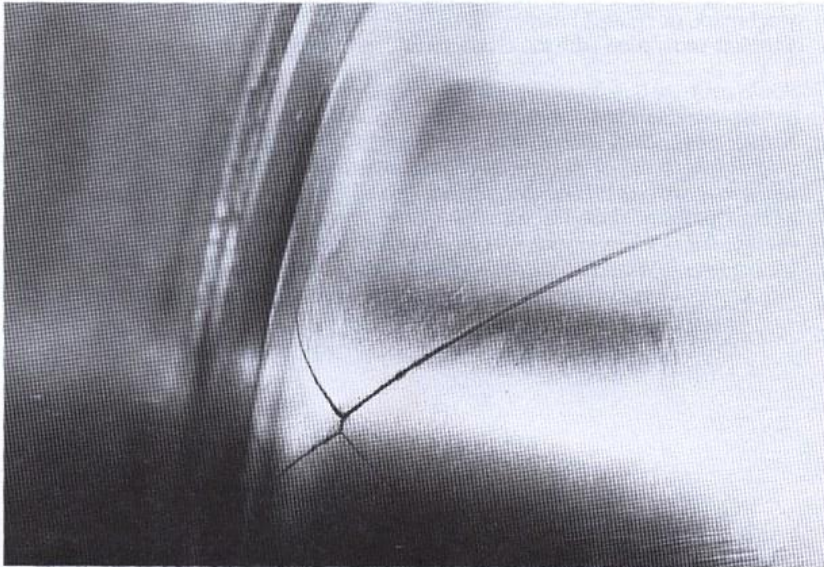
Characteristic X-shaped crack pattern in a 1045 steel crankshaft after testing in reversed torsional fatigue in a special machine, not in an engine. In this case, the original crack was in the transverse shear plane, not in the longitudinal shear plane as in Fig. 28.
